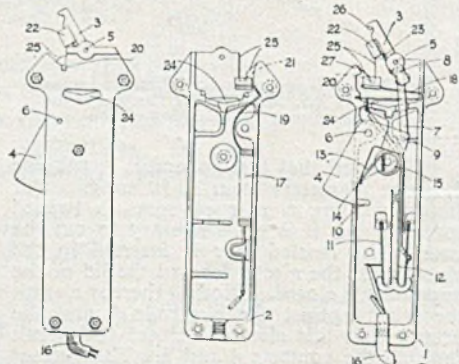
Three views of the tool described in B.P. 564,617/1944. From left to right, side elevation of the casing and the internal arrangements.
